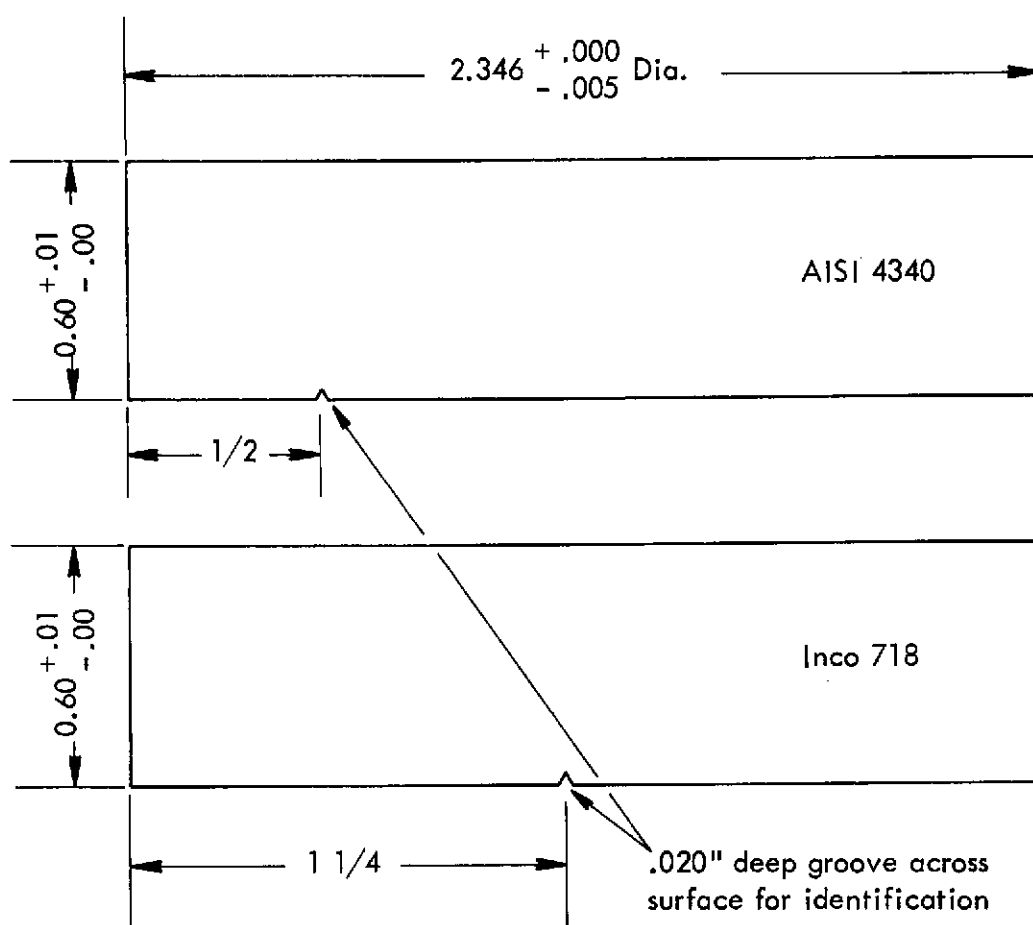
Rotor Blank Components Prior to HIP Welding
